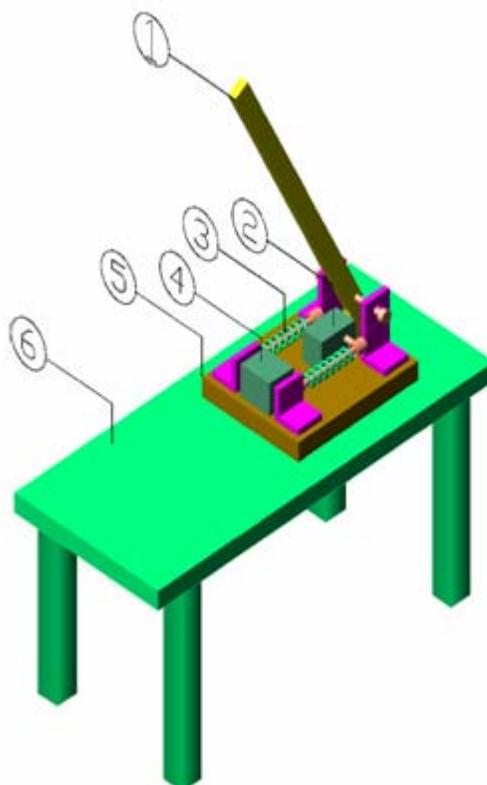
Isometric drawing of the Table mounted dika nut cracking device
